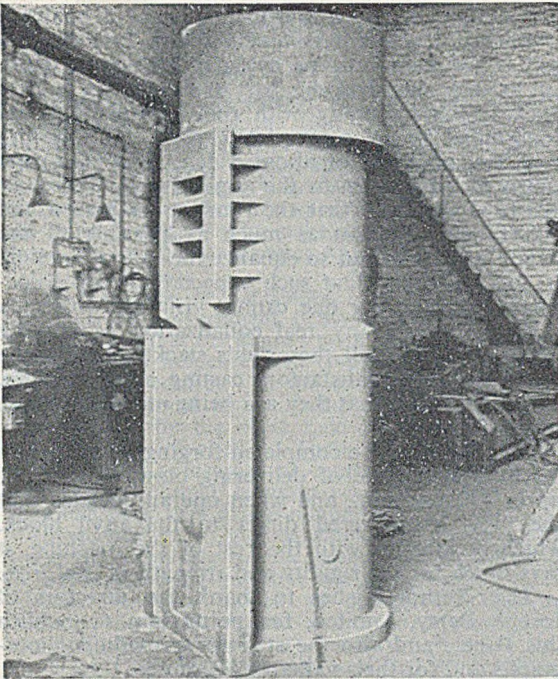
Finished Cylinder Casting, showing the Port Openings. The Feeding Head is still attached.
